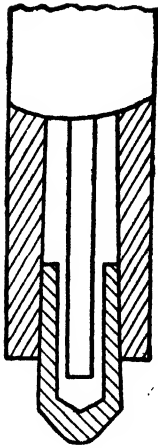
WATER COOLED TIP AND HOLDER FOR SPOT WELDING BRASS
